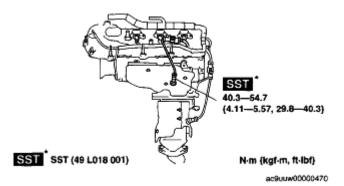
View Of LH HO2S With Torque Specifications Courtesy of MAZDA MOTORS CORP.
